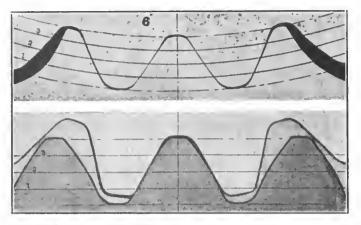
Sections of Lanchester and straight gears in mesh, the Lanchester gear being the upper of the two
